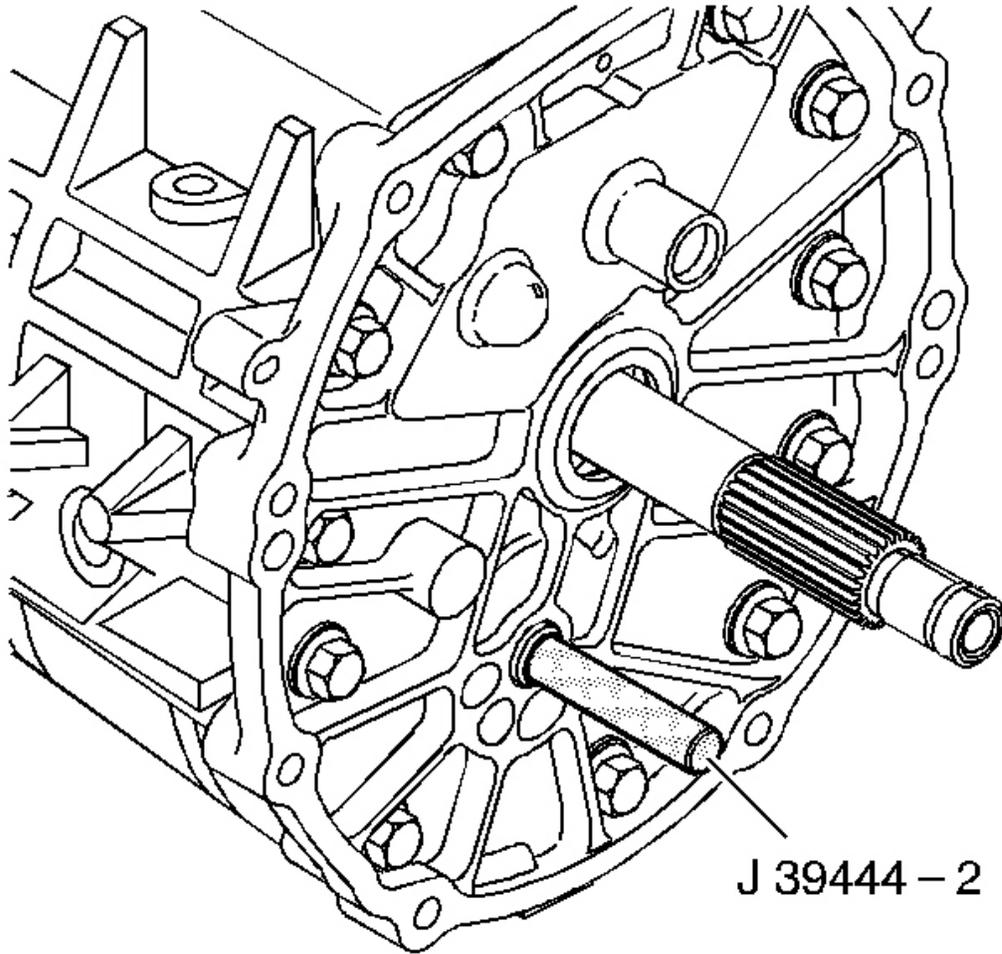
Installing/Installing J 39444-2 In Adapter Plate Plug Hole
